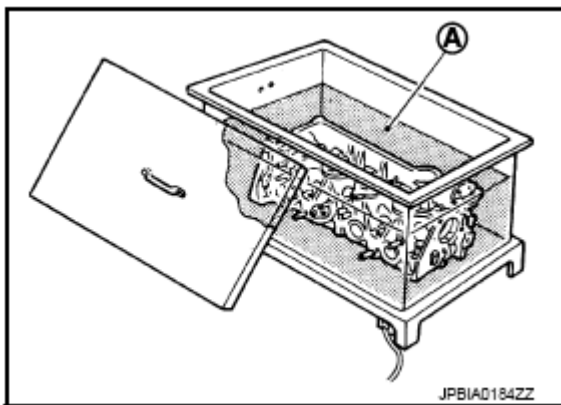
Heating Cylinder Head To Remove Valve Guide
